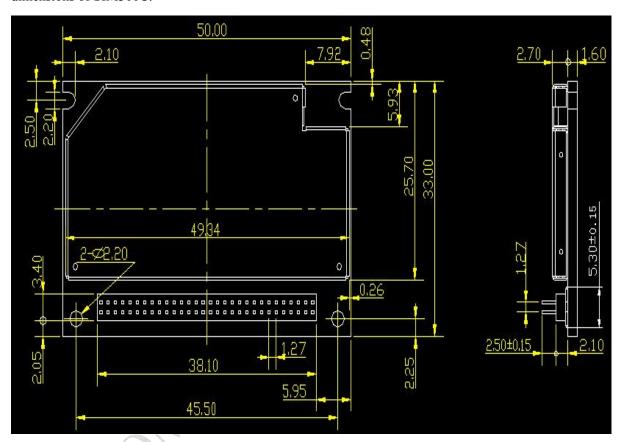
Mechanical dimensions of SIM300C (Unit: mm)
